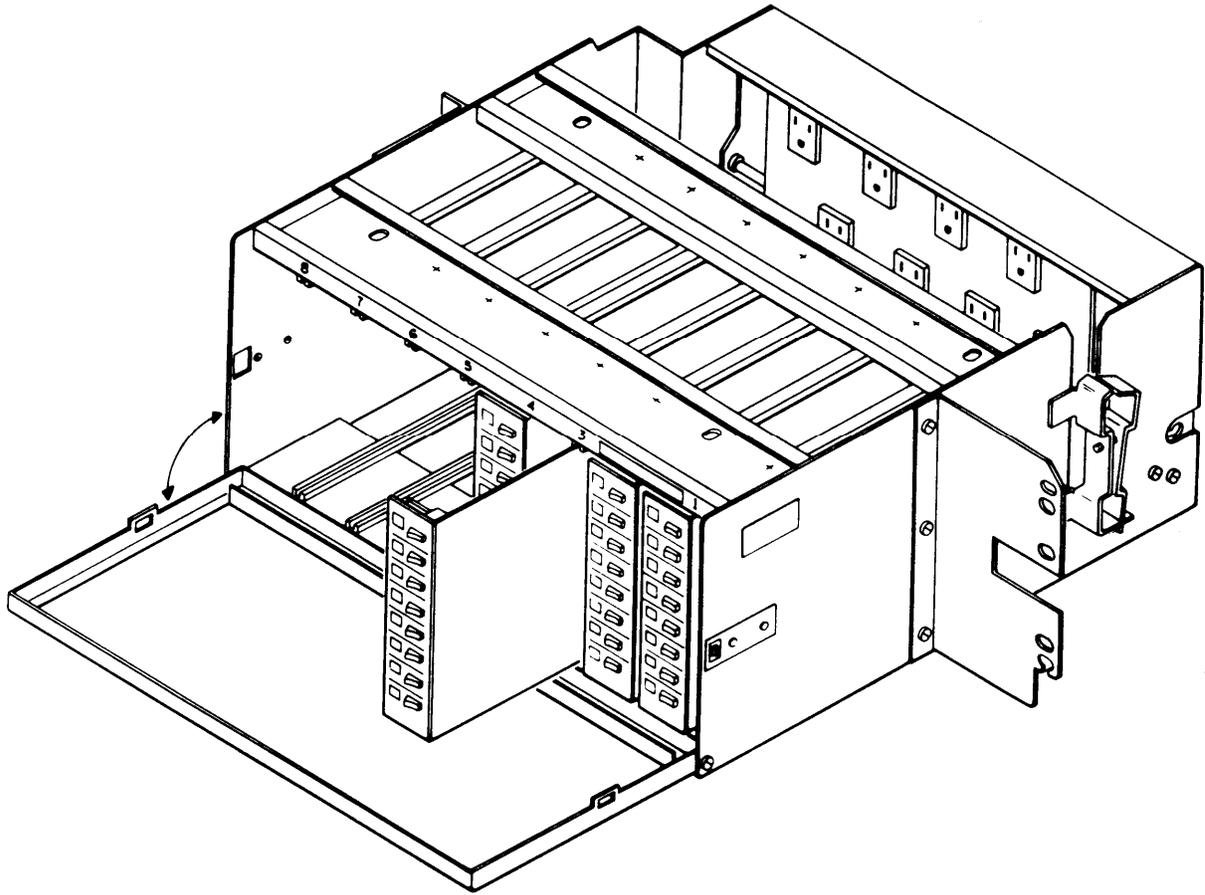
MADU Multiple-Mount Circuit Pack Installation (Front View)
